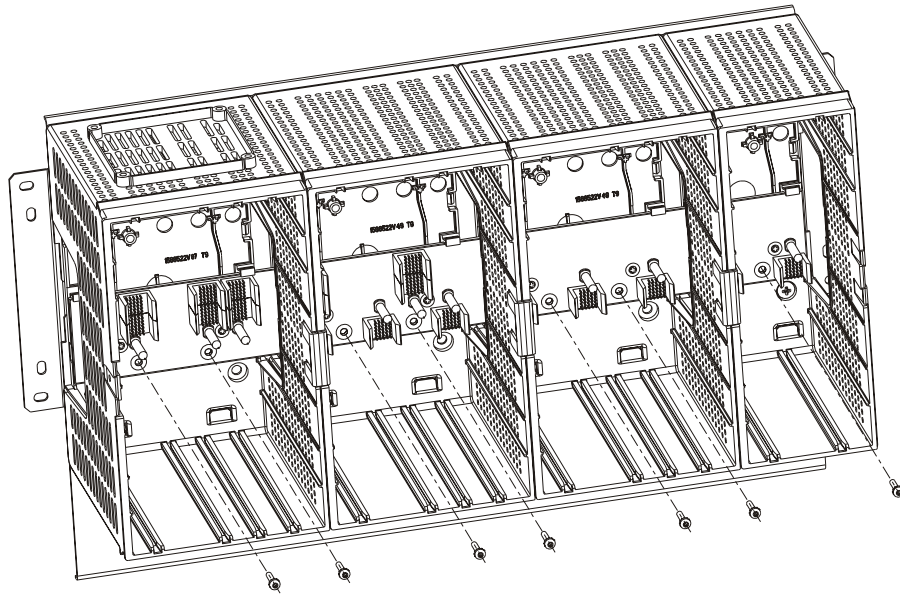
ACE3600 Motherboard on Metal Chassis
